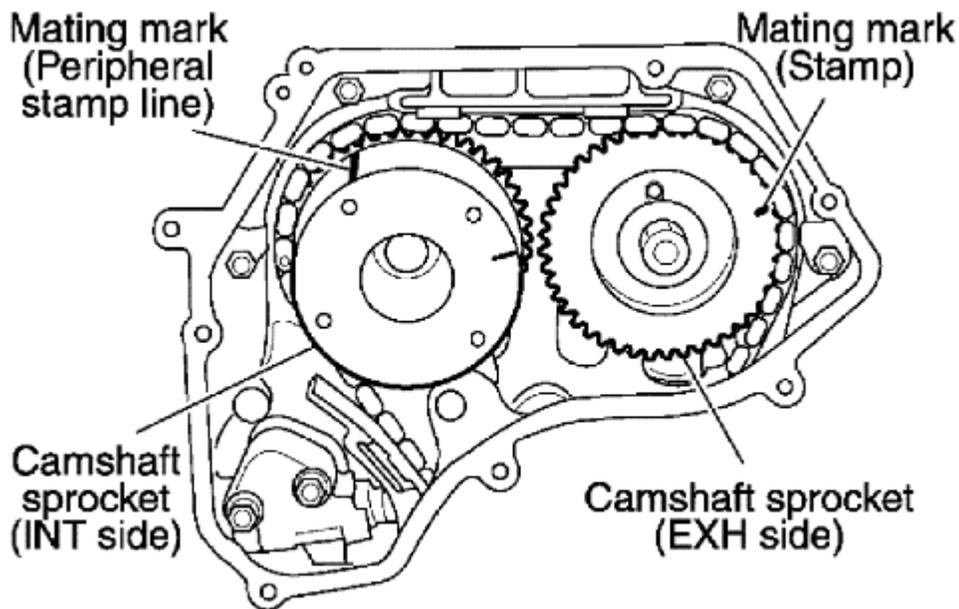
Identifying Mating Marks On Camshaft Sprockets
